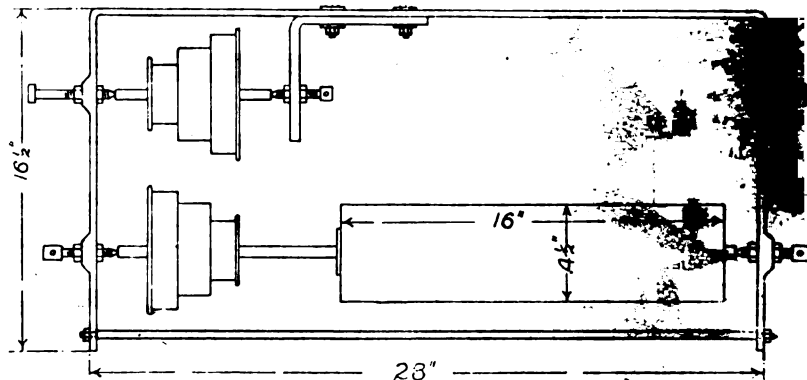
PLAN OF OVERHEAD GEAR. (Scale: 1½ ins. = 1 ft.)
